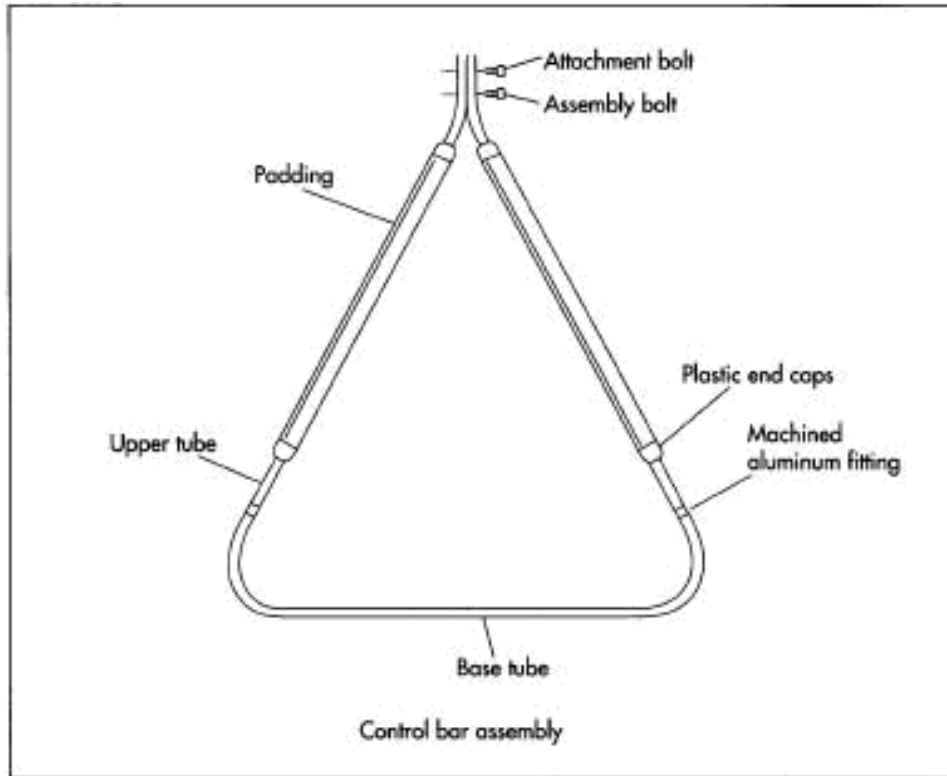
The frame is formed by assembling the control bar and tubing. Stainless steel nuts and bolts are used to hold the parts in place [21]
